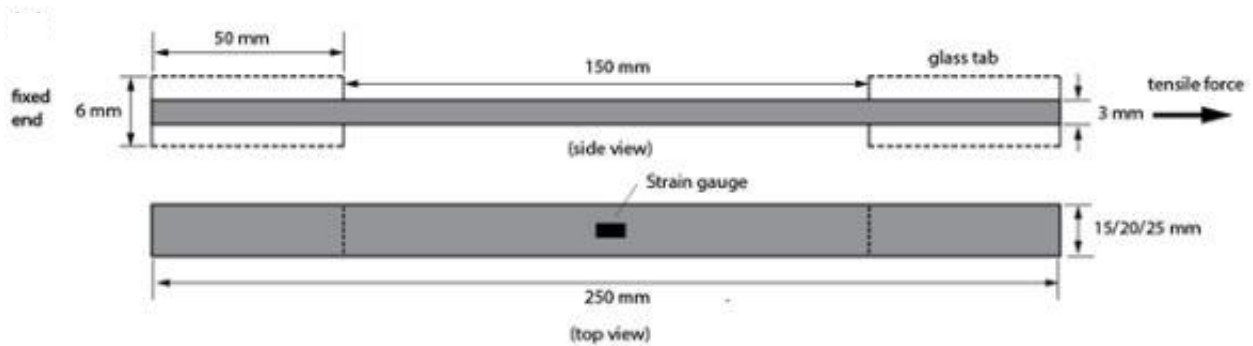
Tensile test specimen ASTM standard D-3039 dimensions
